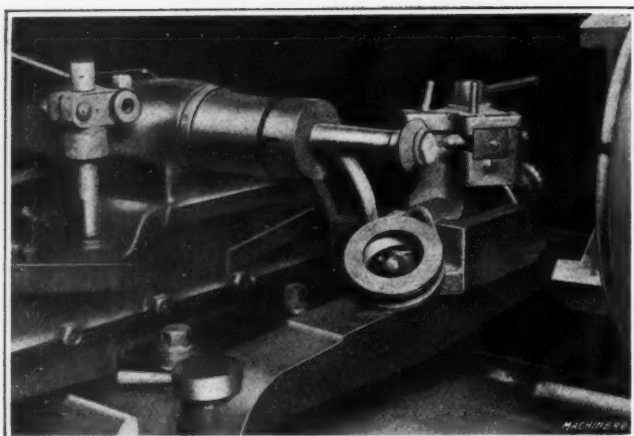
Double Angle Wheel Truing Device shown set up and in Operation on Heald Internal Grinding Machine
